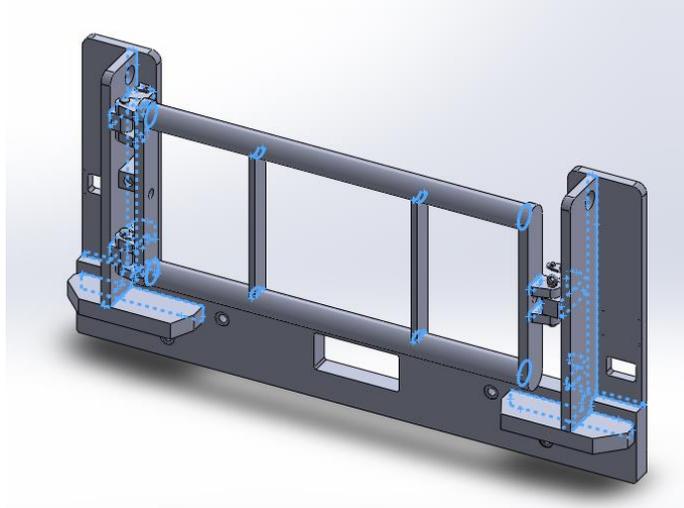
Original Rear Protection Systems Weld Seams
